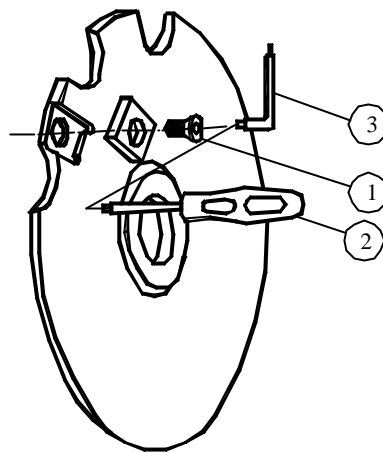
The side milling cutter type T-MAX SANDWIK with removable inserts.
